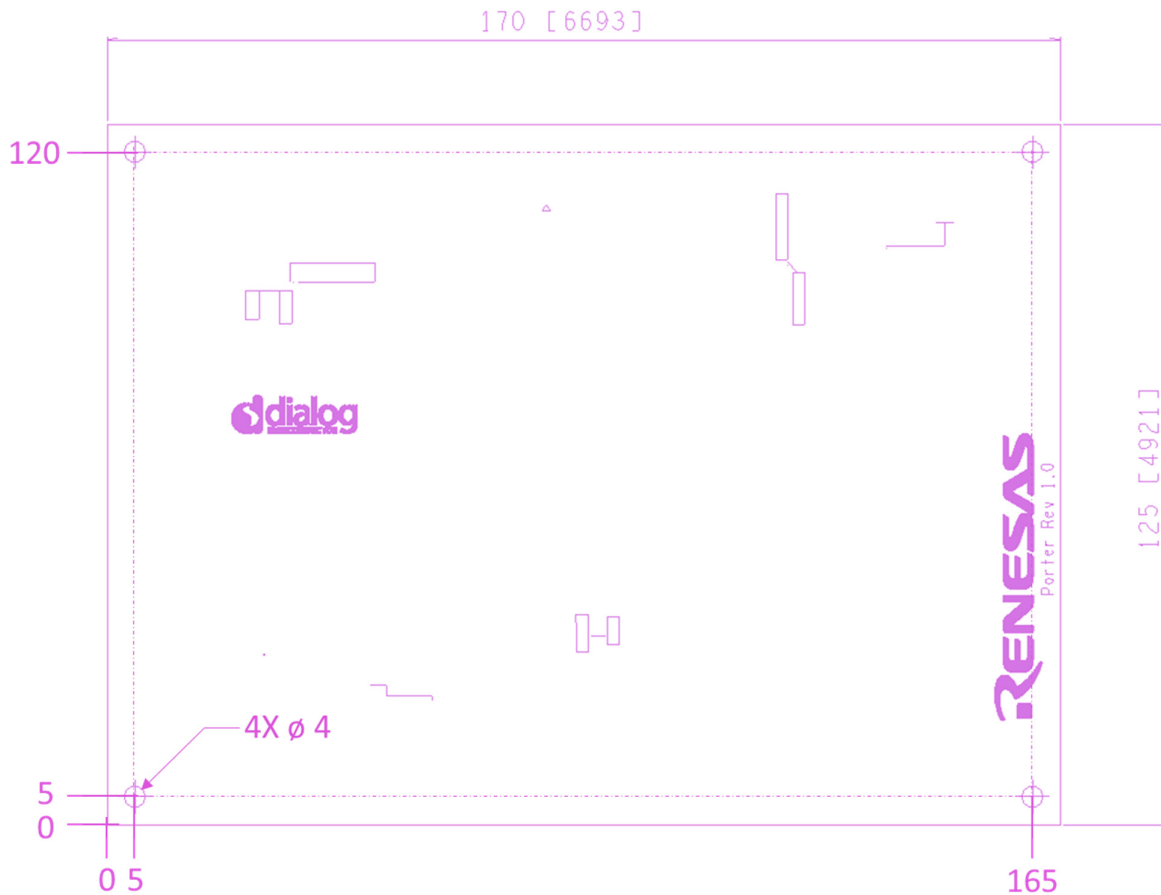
External Dimensions and Hole Locations of the R-Car M2 Application Development Board (Top View)
